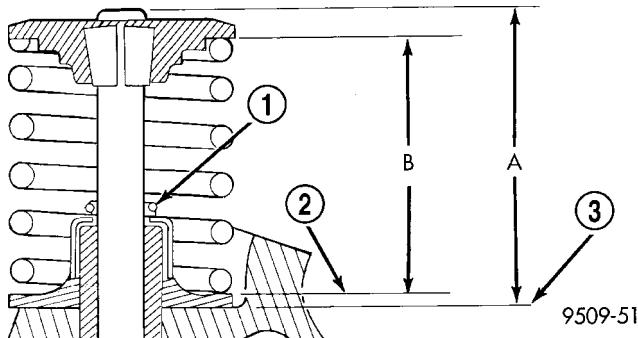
Checking Spring Installed Height and Valve Tip Height Dimensions
